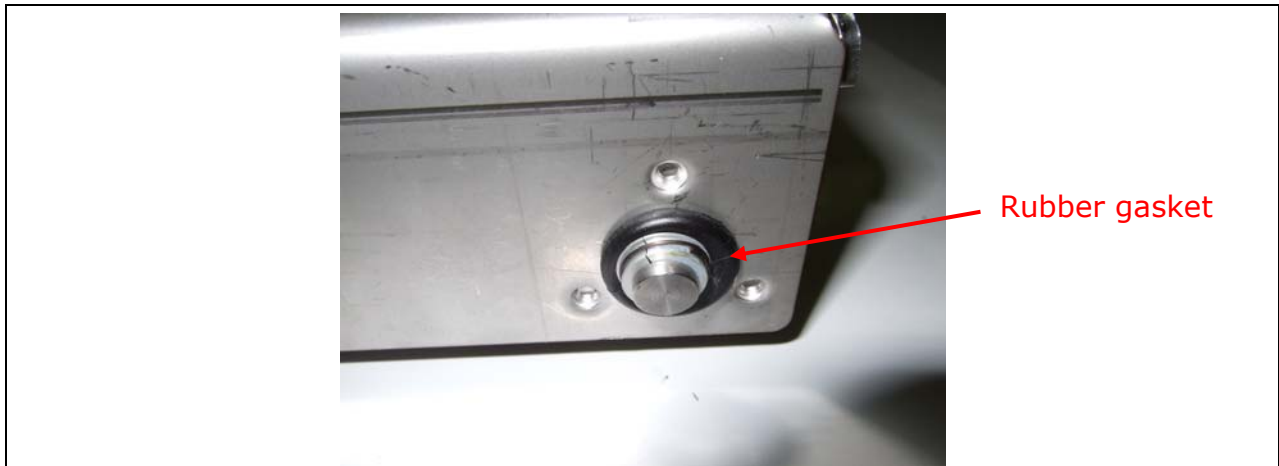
Step 2 is to press out the 4 rubber gaskets with a blunt tool and finally to remove the carrier plate
